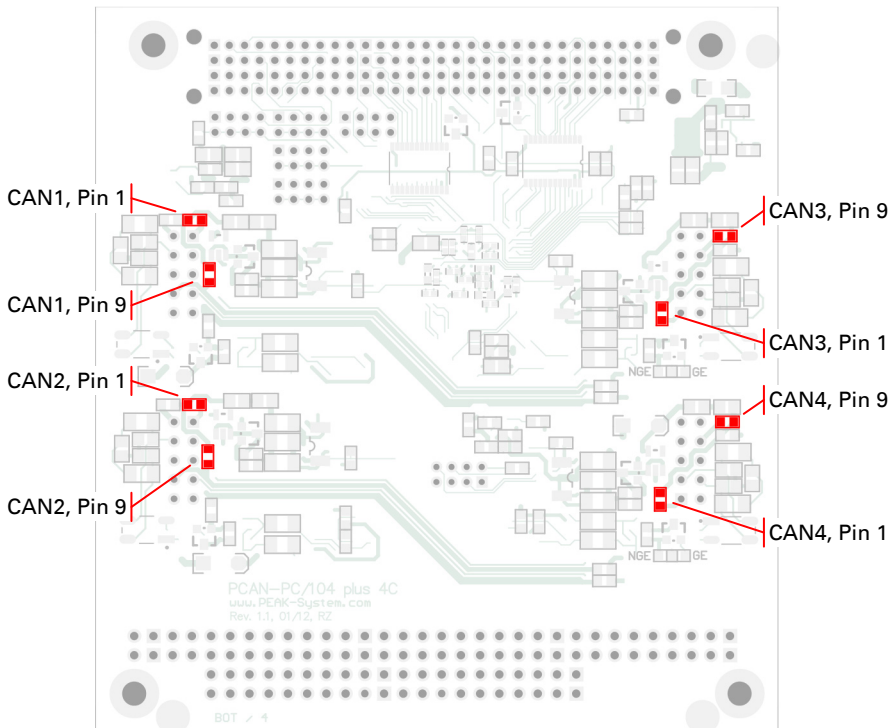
Positions of the solder fields on the board's bottom side for a 5-Volt supply at the CAN connection (D-Sub)
